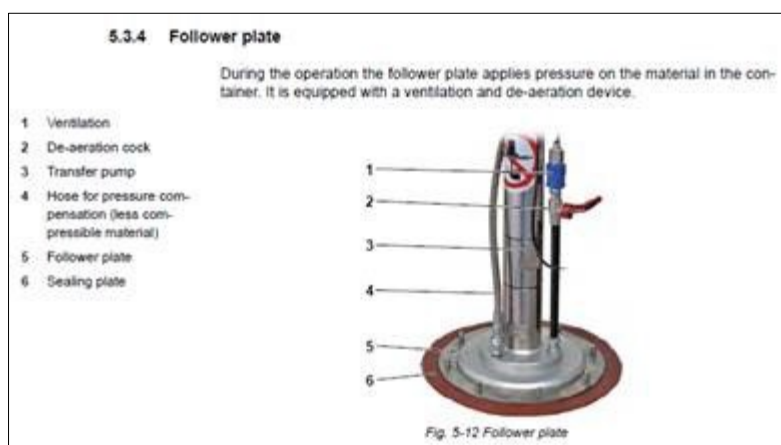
Annotated Follower Plate from the bulk mixing machinery
